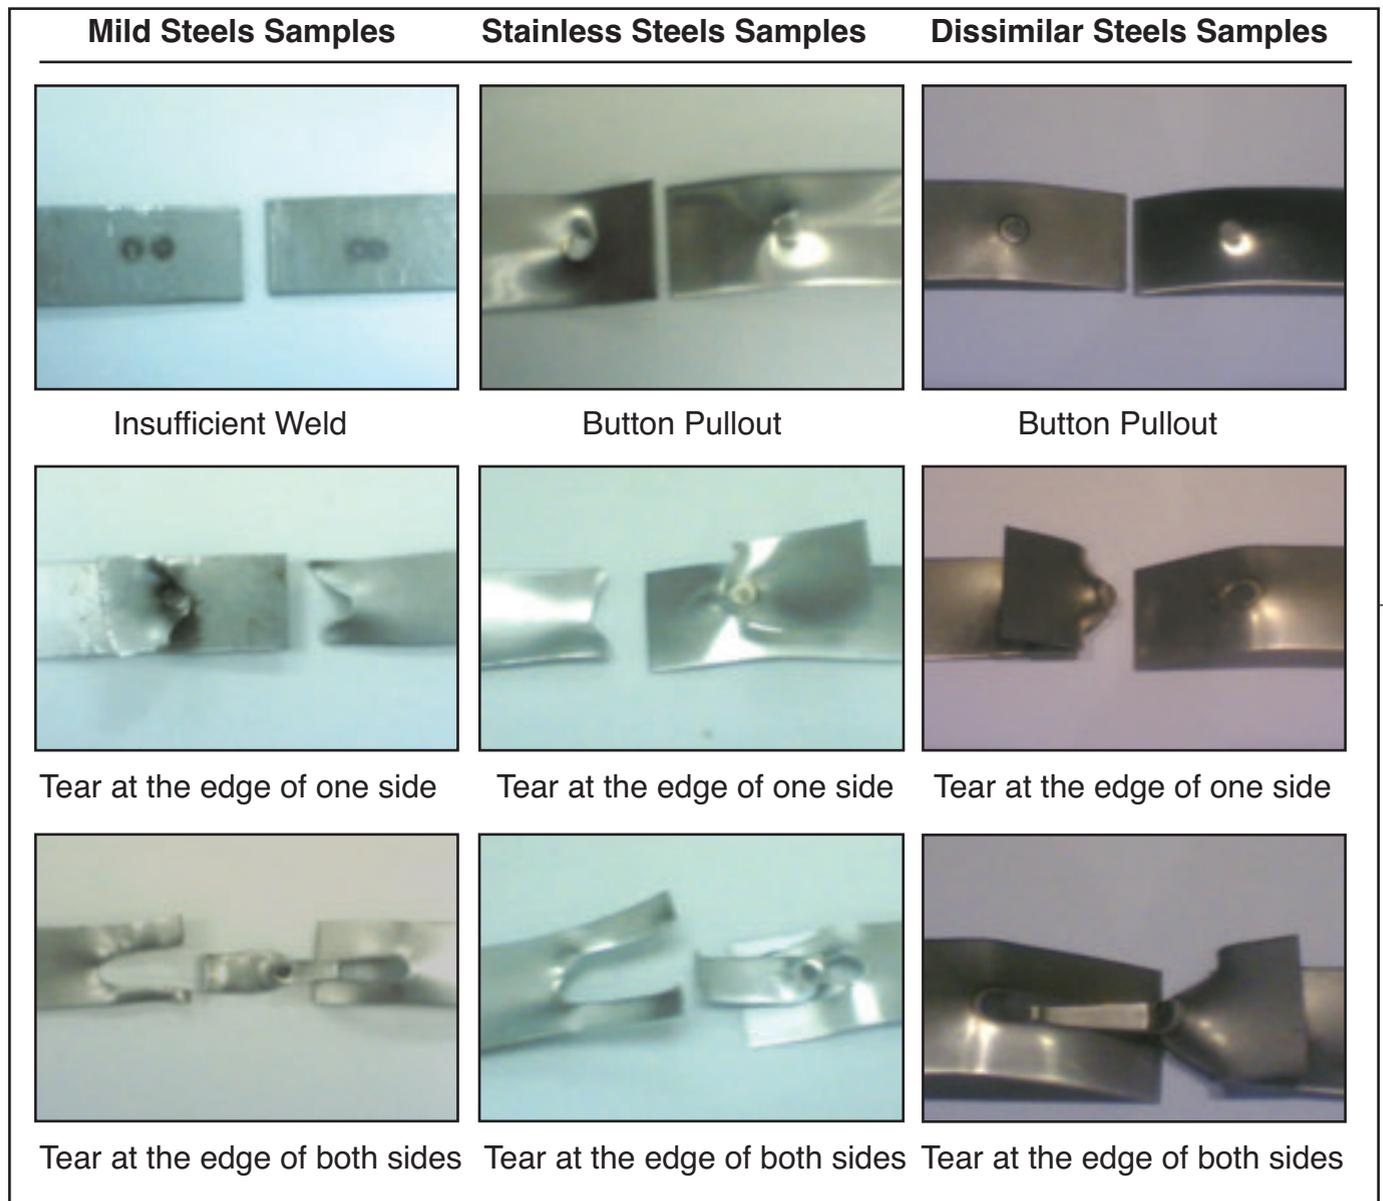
Tensile tested samples of mild, stainless, and dissimilar steels.
